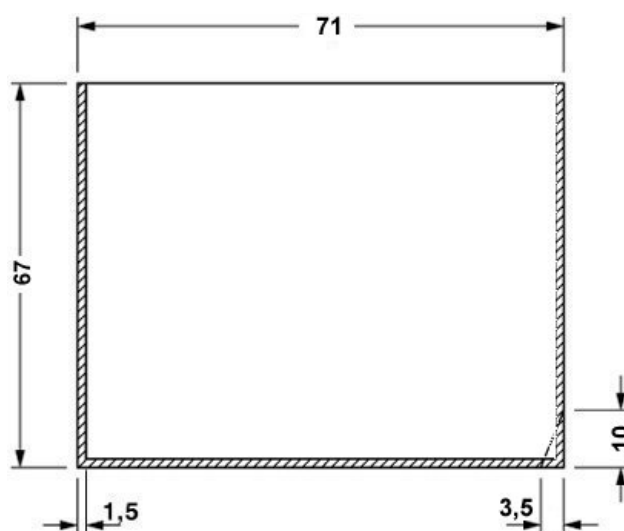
Dimensioned drawing 5 - valid for PCB 9, see Explosion drawing.
